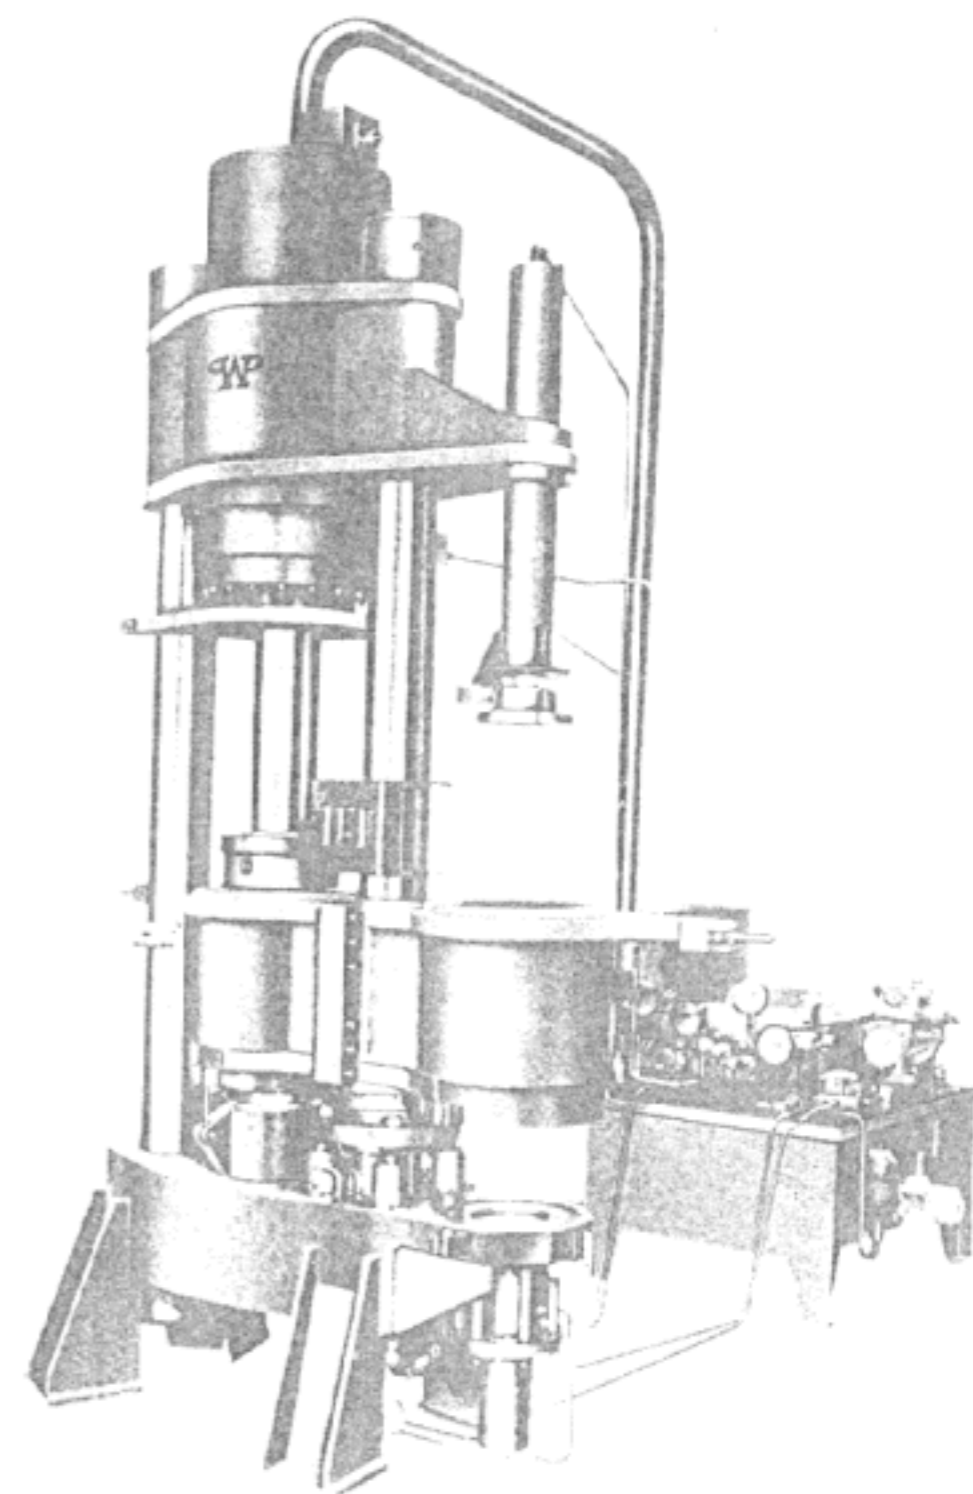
Modernized classical heated extrusion press for double-base powder (Courtesy Werner & Pfleiderer, D-7000 Stuttgart, FRG).
